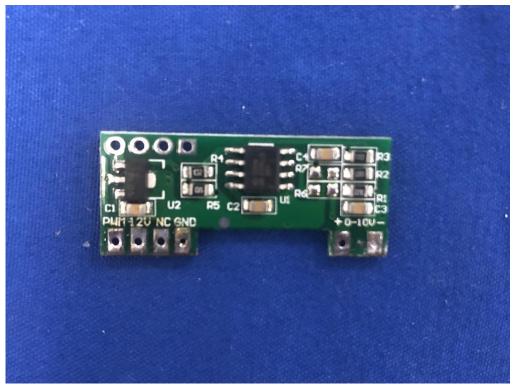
0-10V Dimming PCB view of model BQ-060ANPC
